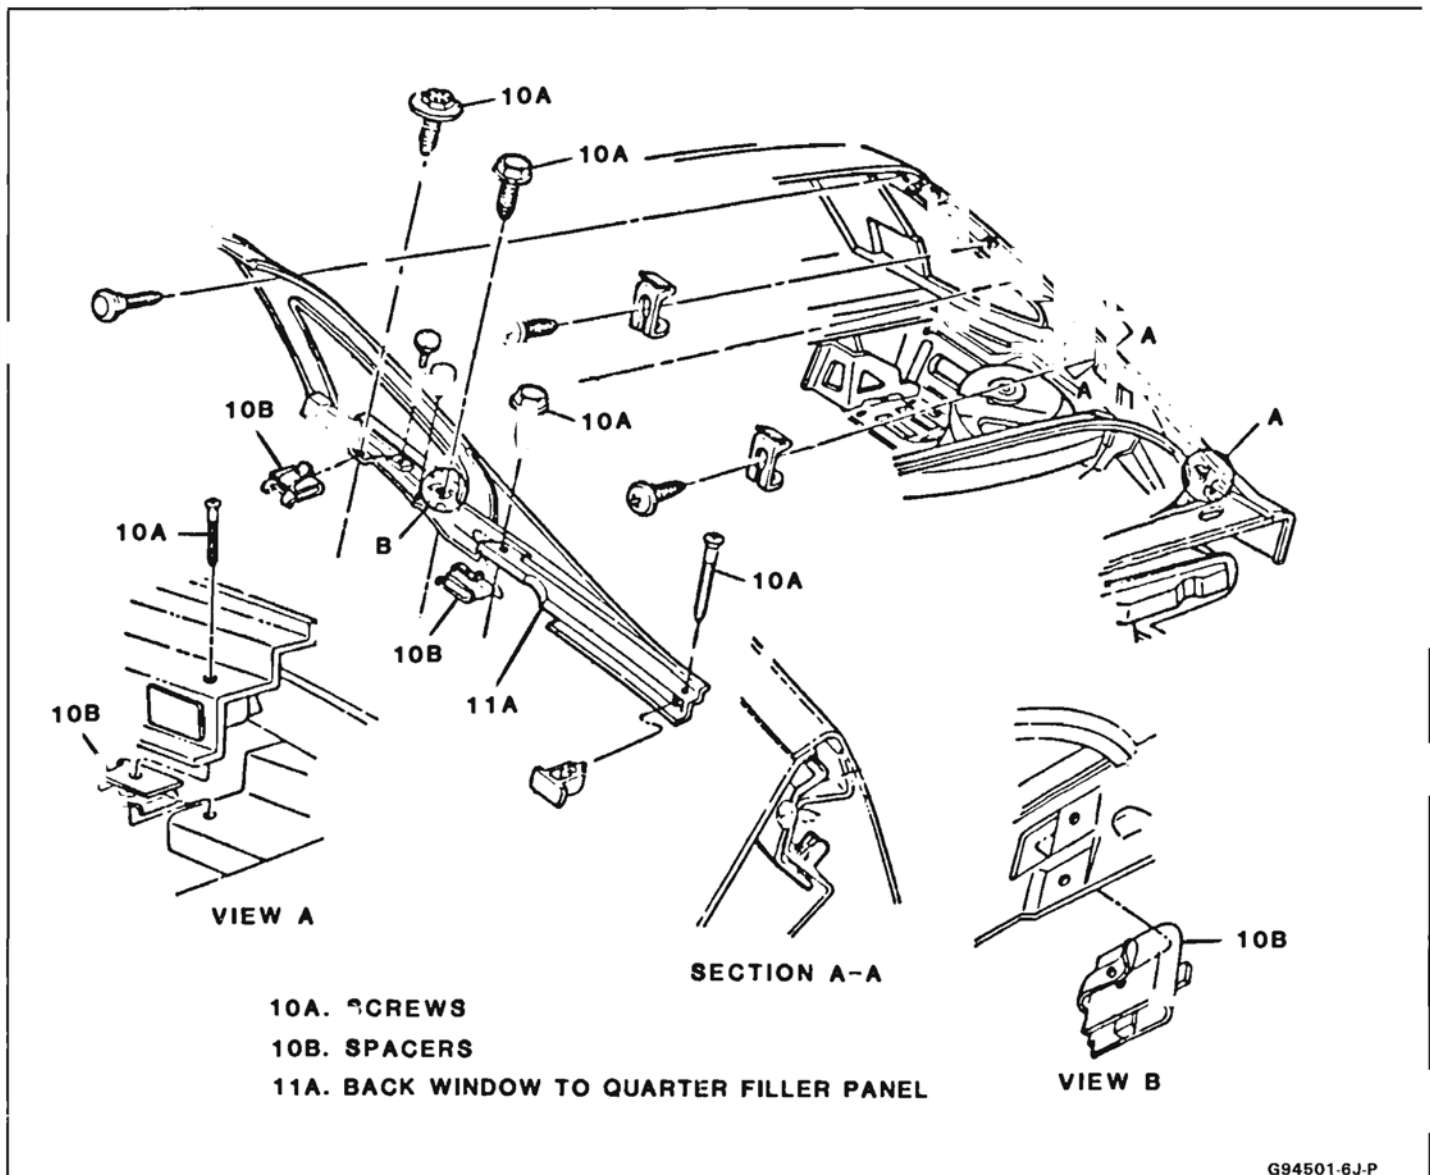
Installing Back Window to Quarter Filler Panel - 97 Style
